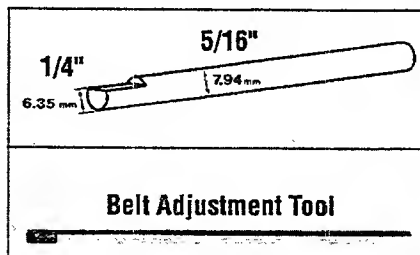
Use this belt adjustment tool to measure and adjust drive belt tension.
